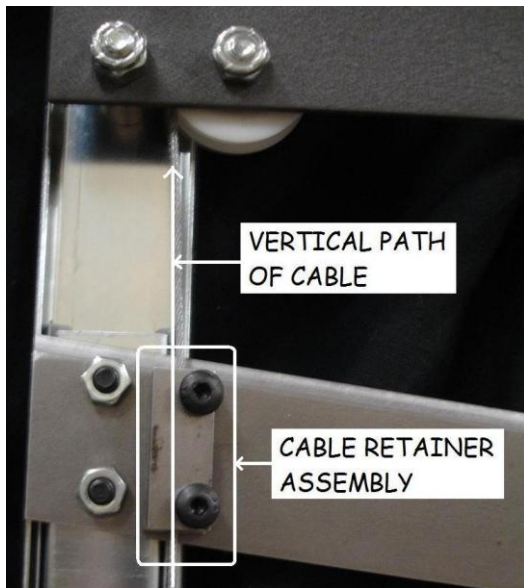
Slide Bar & Retainer Assembly (left side)
